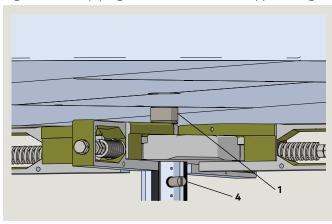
Top plug extended into canopy bearing, cross pin holes aligned
